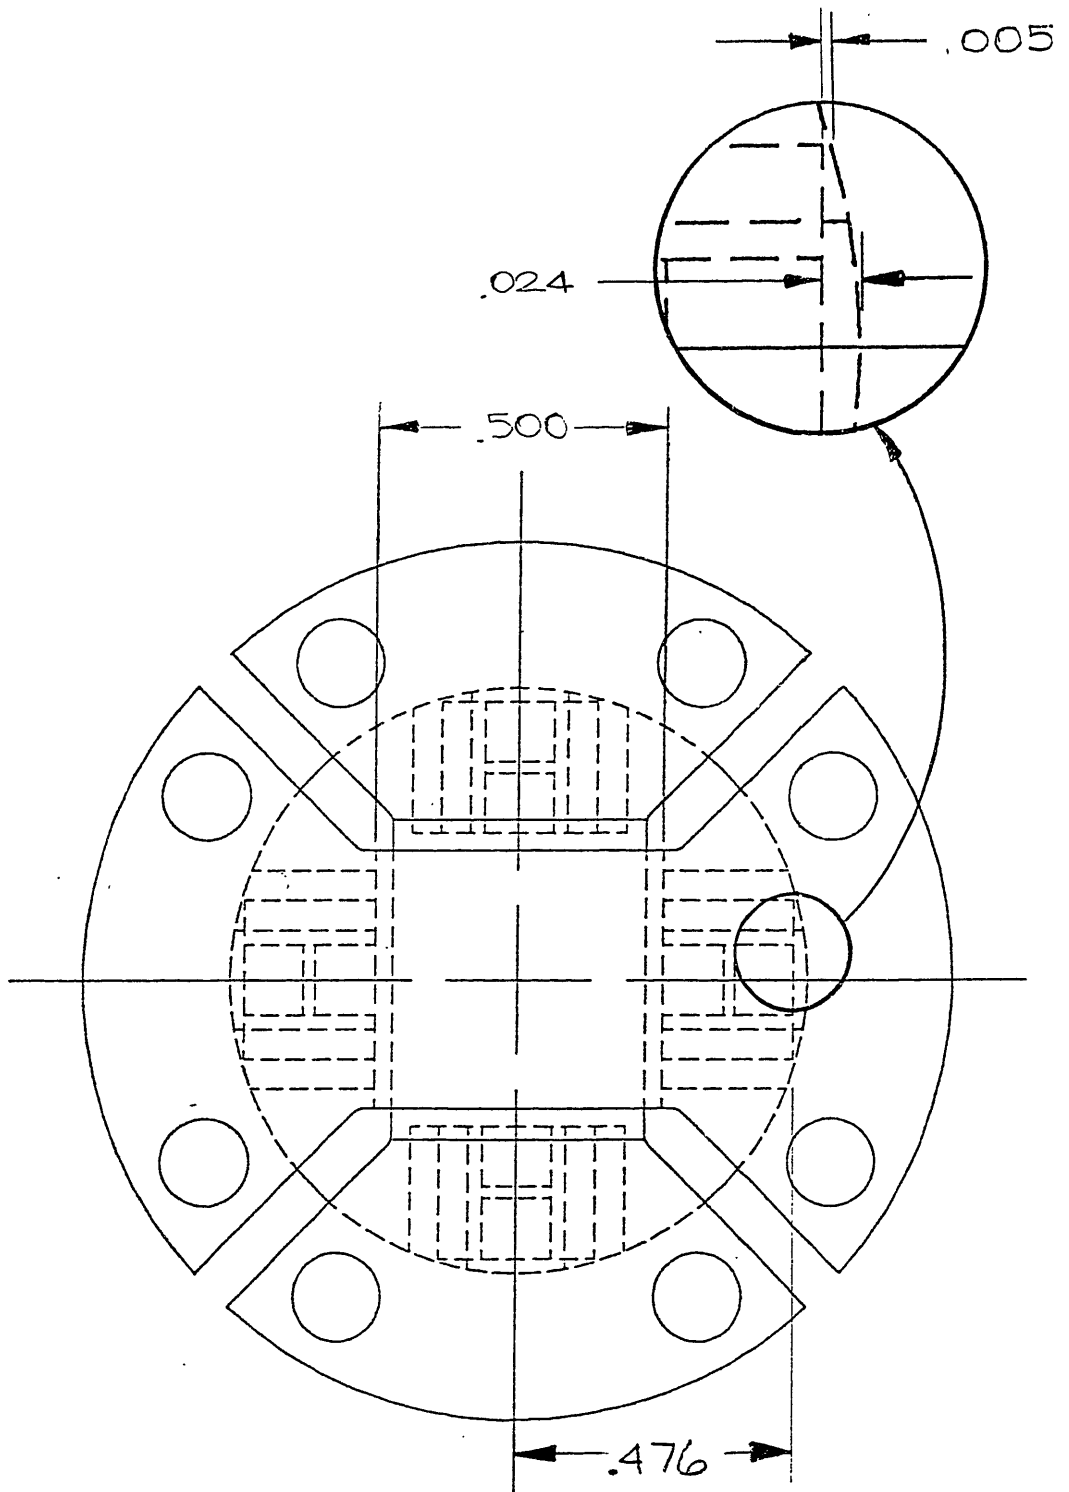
Bottom View of Assembly Showing Bridge Length and Clearance Between Blade and Outer Diameter
